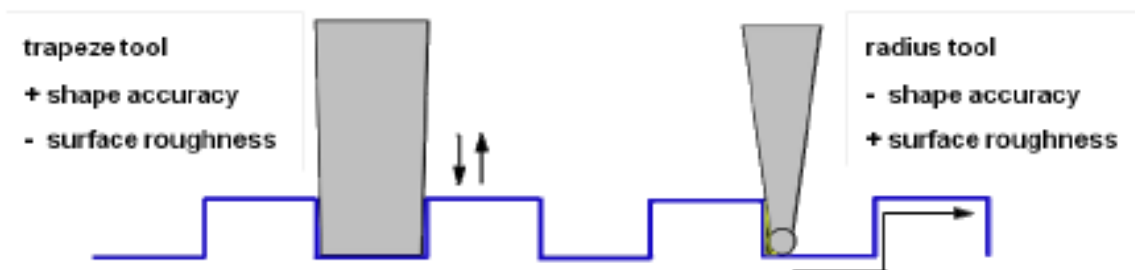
Form Tool (left) and Radius Tool (right) showing typical tool paths (Steinkopf, et al., 2015)
